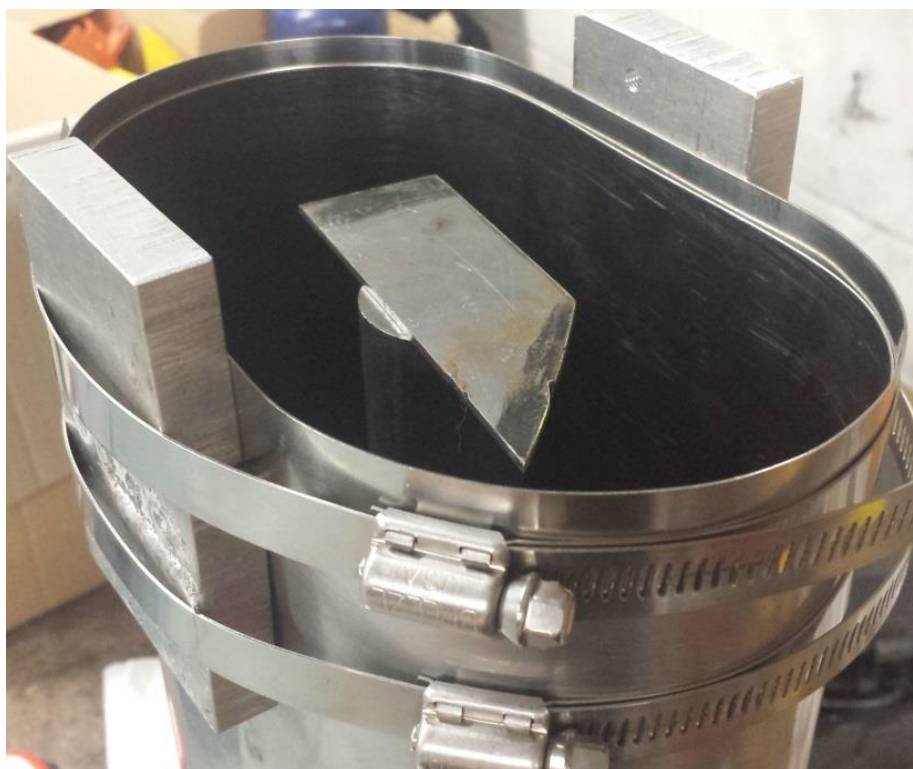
Endcap strip jugged to muffler case, and endcap bulkhead stand balanced in center.
